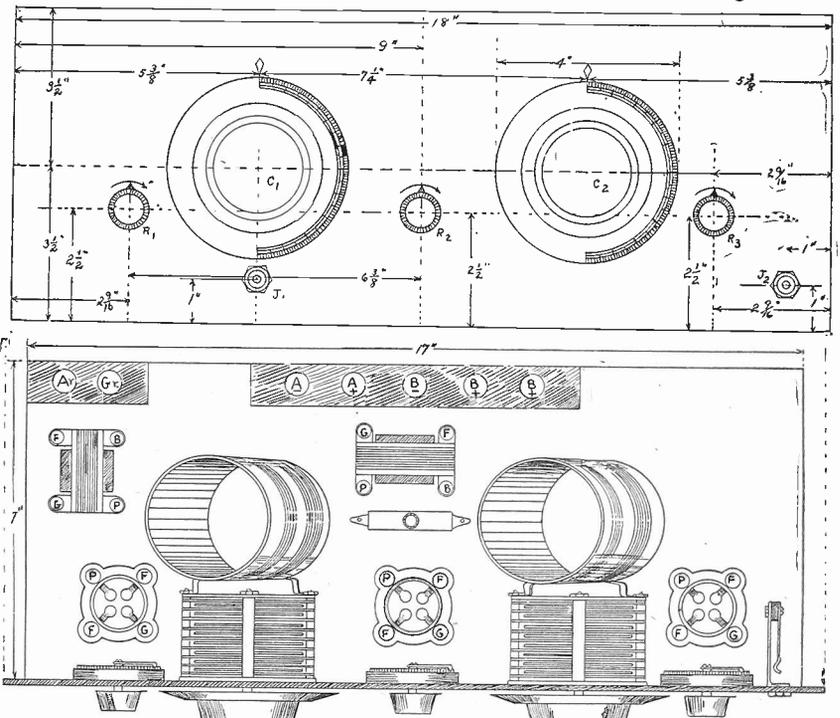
(top), panel layout; Fig. 3, Assembly plan.
